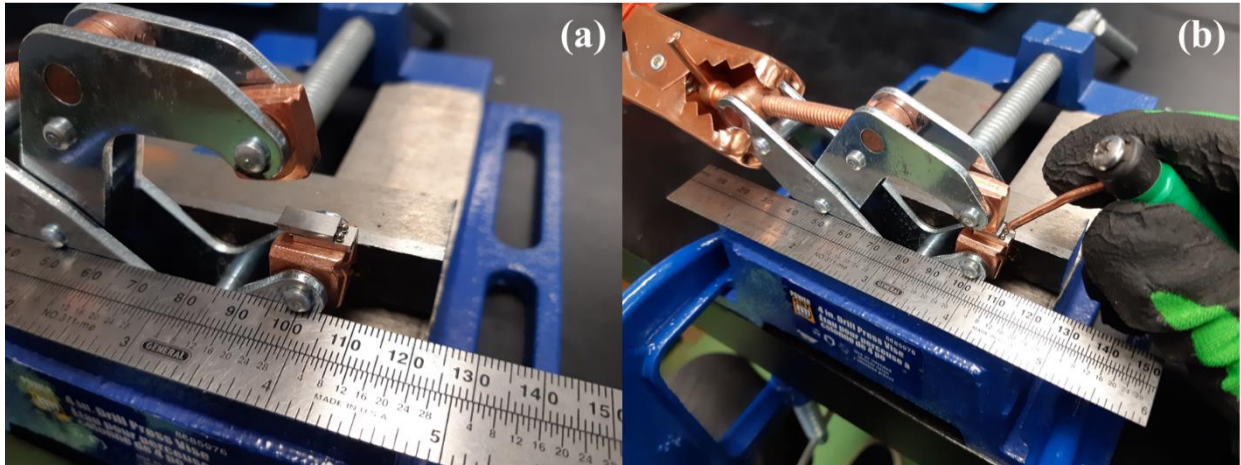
Full Joint DIL Sized Sample in Vise (a) Prior to Welding; (b) During Welding
